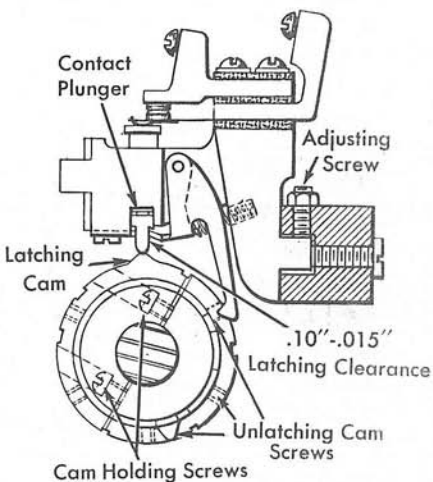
Latching Plunger Circuit Breaker, Adjustments 6, 7, and 8
